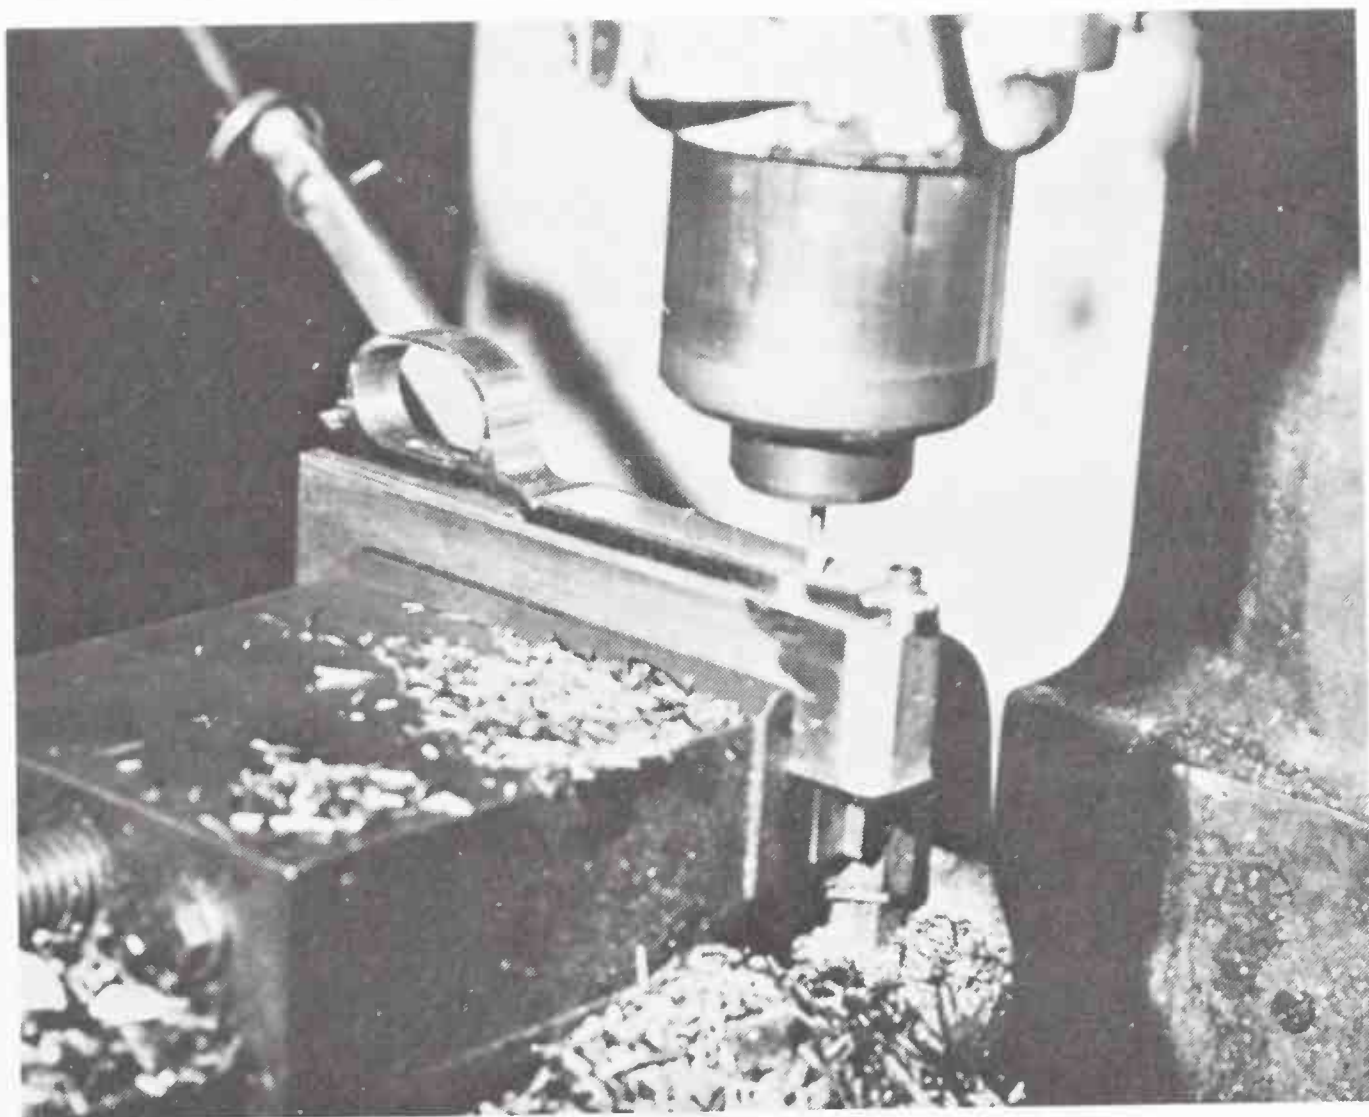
One-piece trigger guard for Winchester Model 70 (pre-1964) being machined on milling machine.
